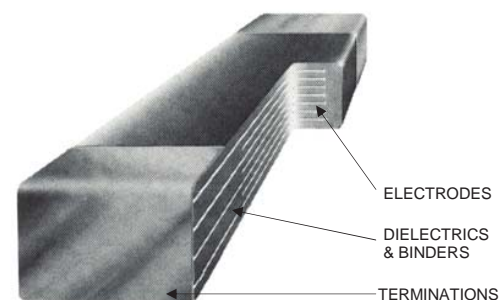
Cutaway view of a chip capacitor. (Courtesy of E.I. du Pont de Nemours & Co., Inc.)
